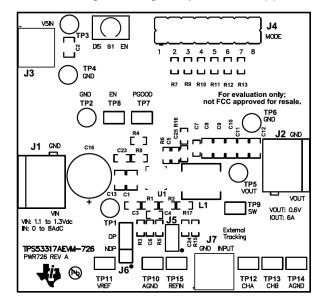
TPS53317AEVM-726 Top Layer Assembly Drawing (Top View)
